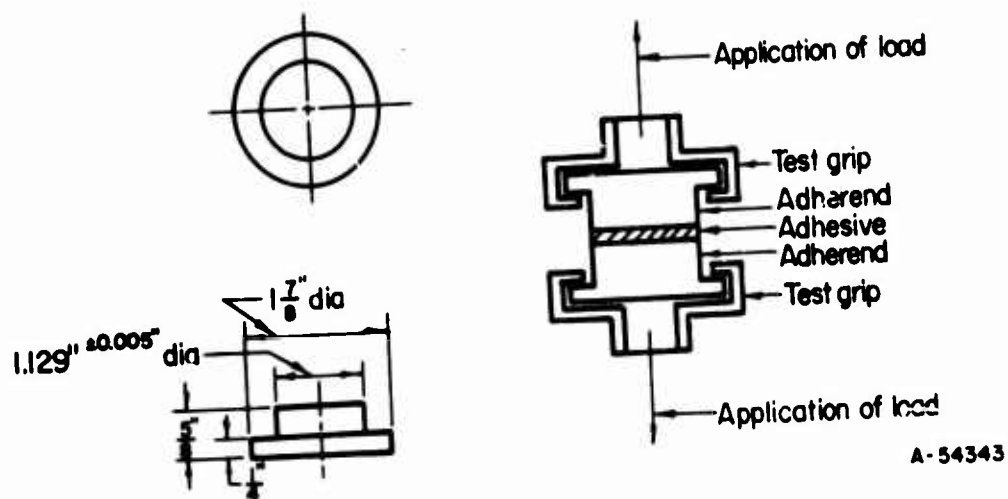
ADHEREND BLOCK AND TESTING ARRANGEMENT
